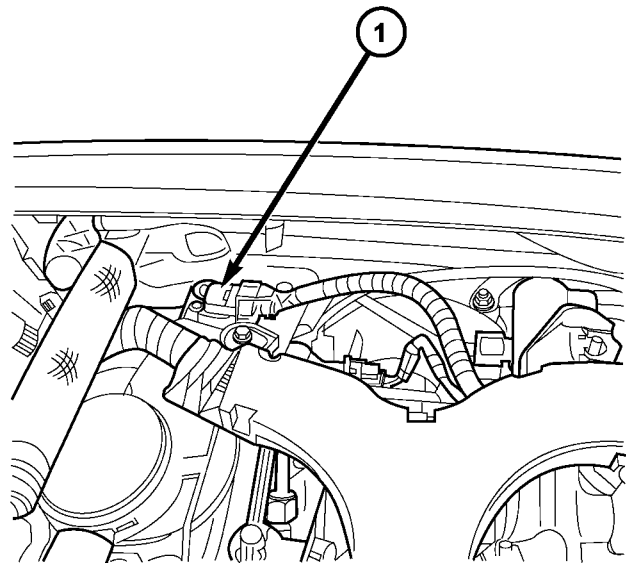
CAMSHAFT POSITION (CMP) SENSOR
